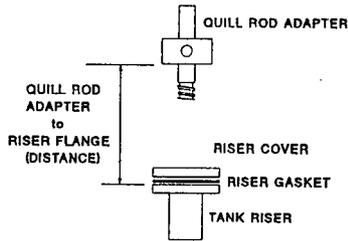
Quill Rod Adapter to Riser Flange Distance.
